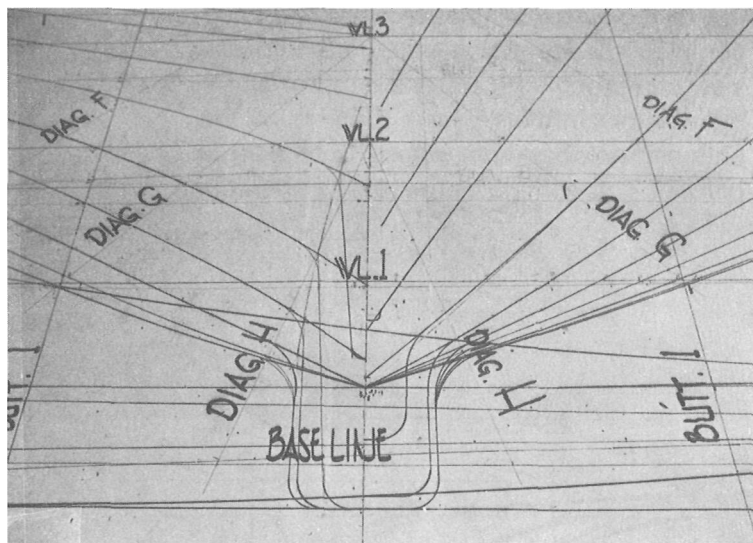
WATER LINES AND SHEER IN PLAN VIEW. Here drawn foreshortened on the Lofting Floor
